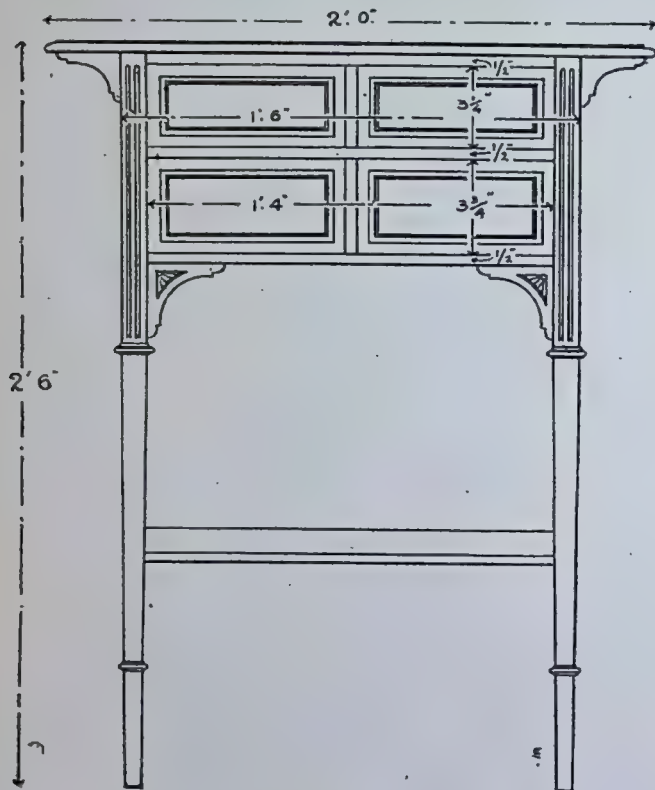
DIMENSIONED FRONT VIEW OF TABLE.
